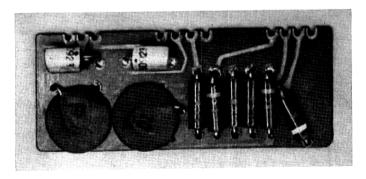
(b) — Scanner plate of the line unit shown in Fig. 7 (a).
